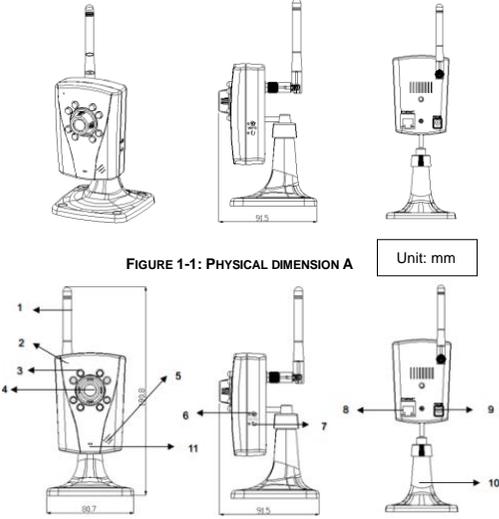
PHYSICAL DIMENSION A Unit: mm
